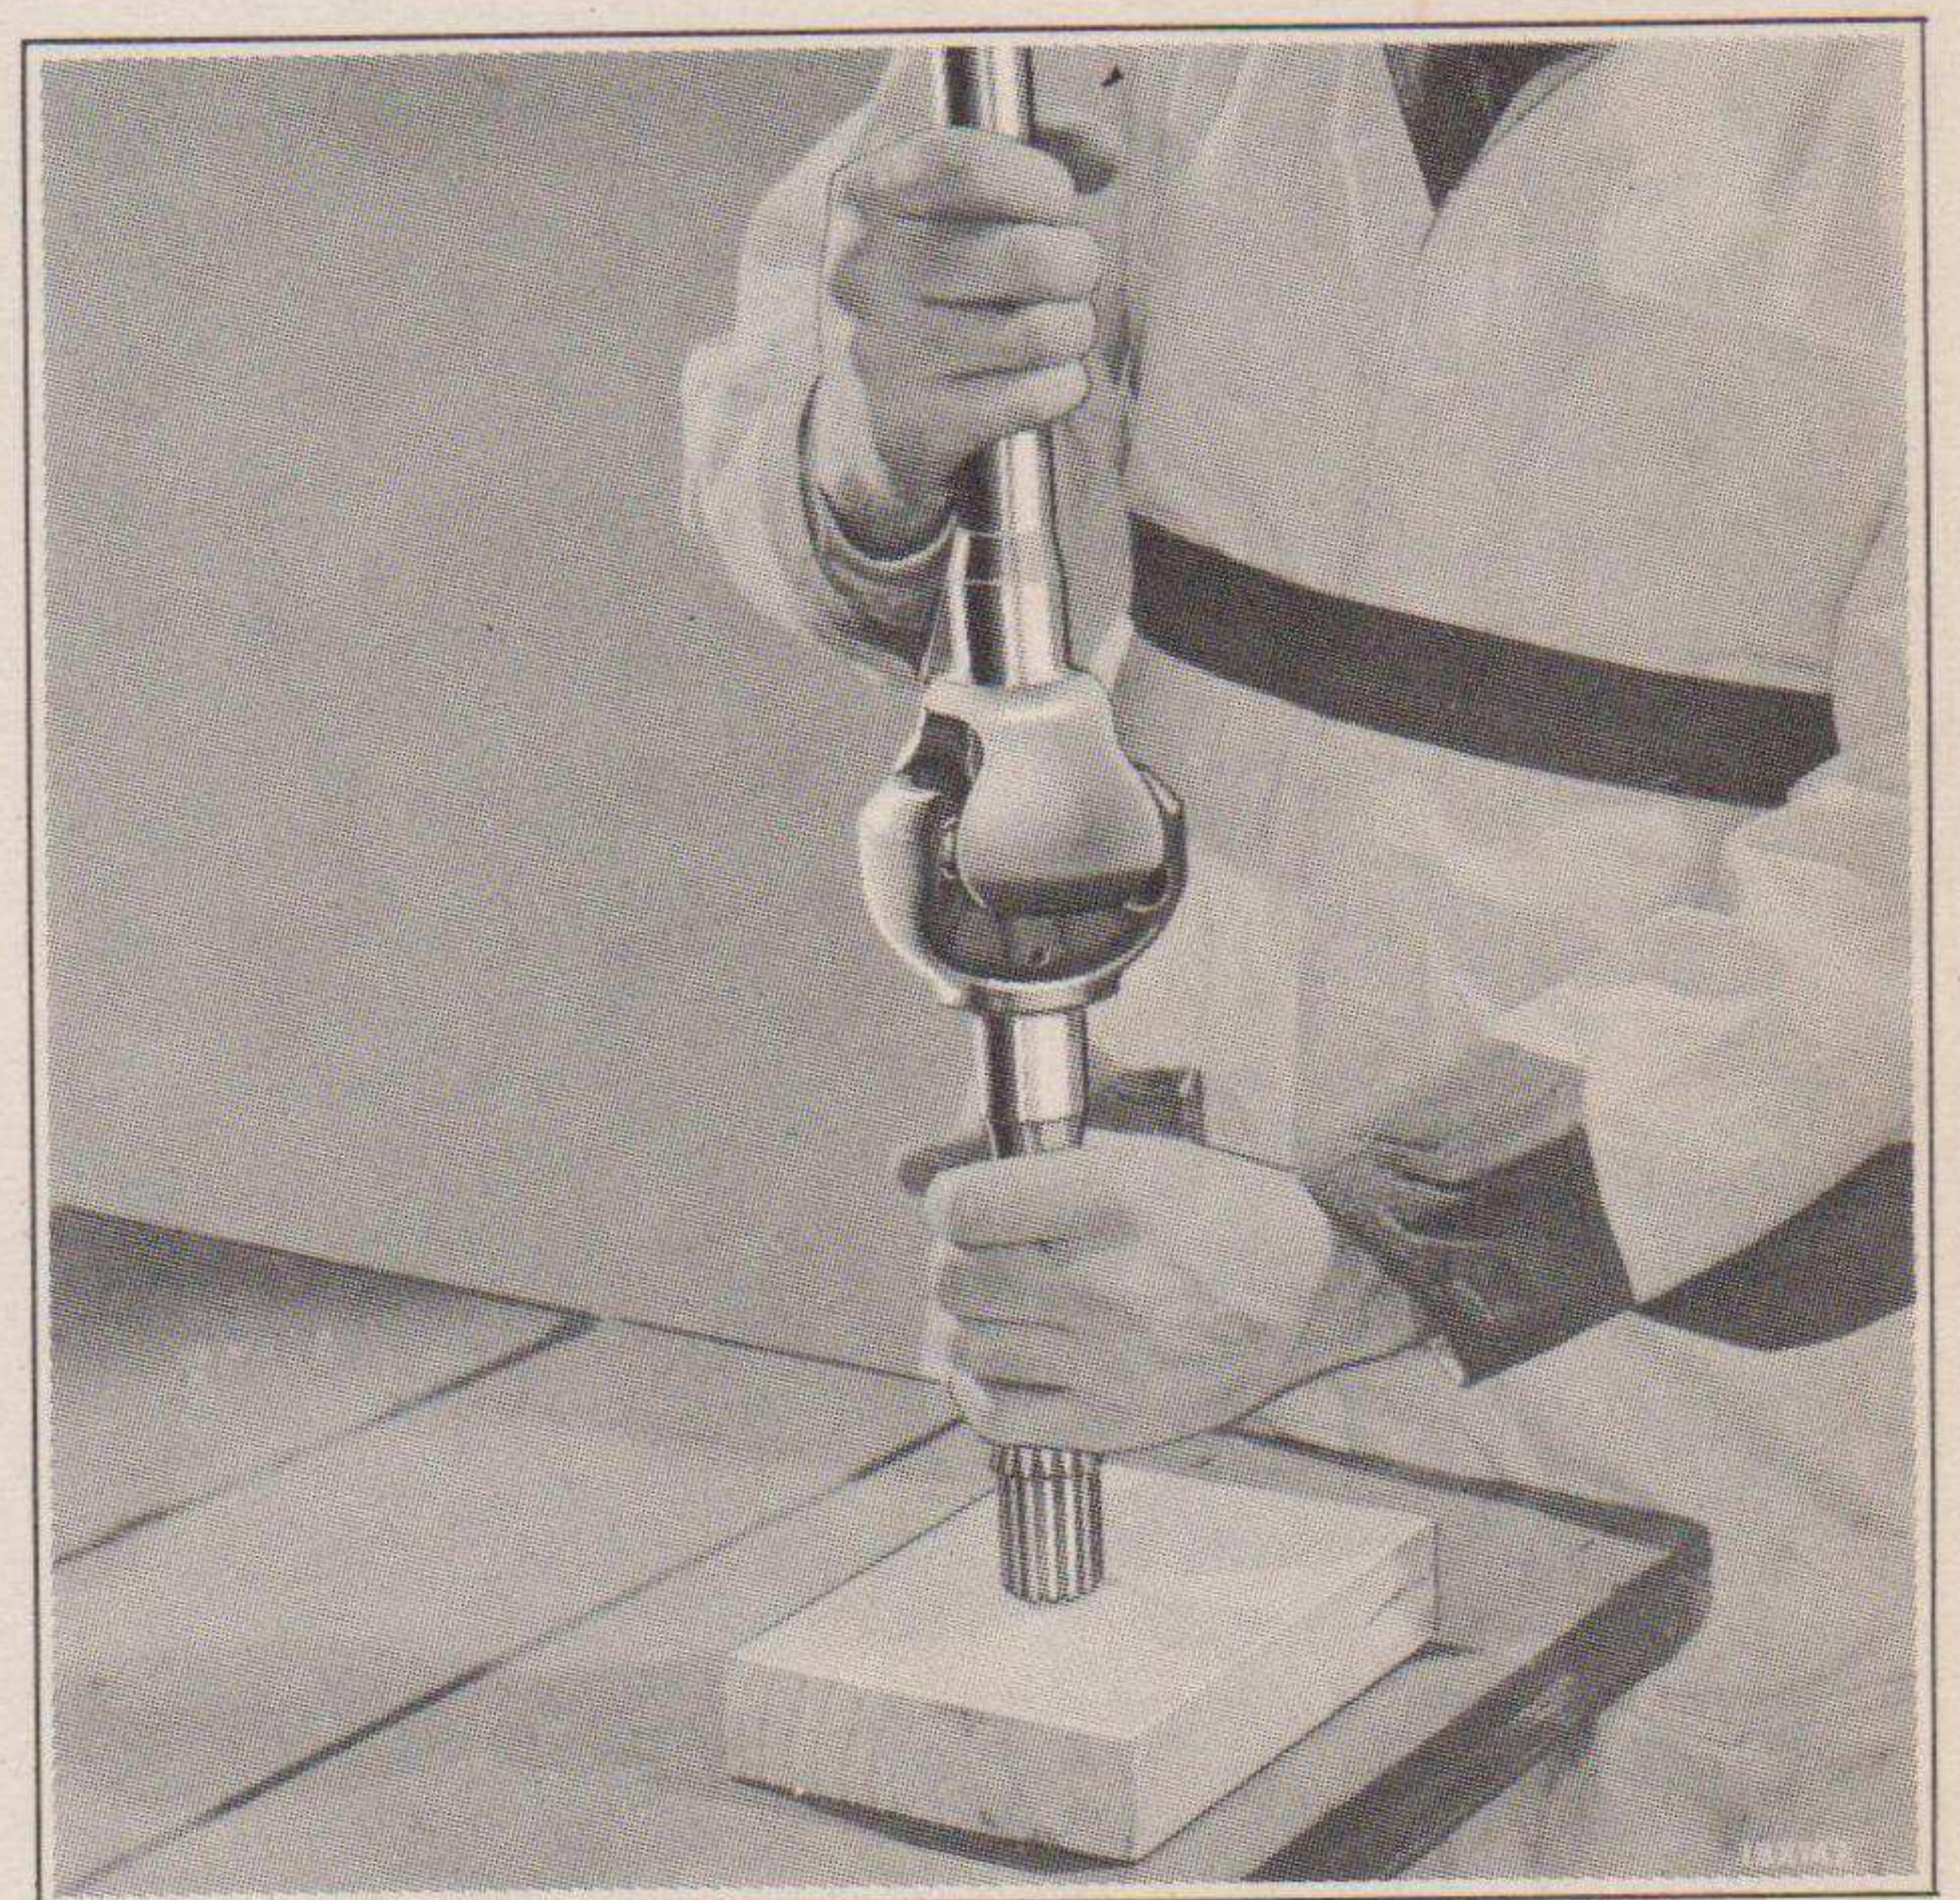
Dislodging Universal Drive Center Ball Pin (Bendix-Weiss)
